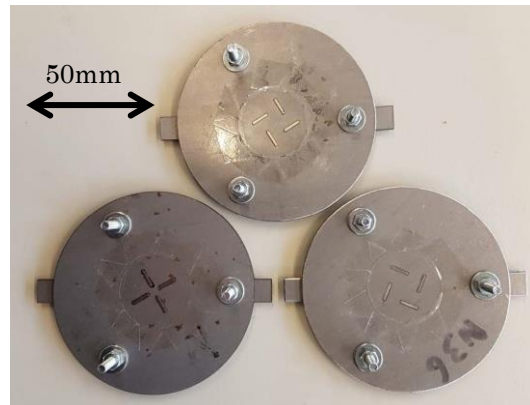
Picture of the hydrodynamic bearing designs used to show the self-healing bearing principle.
